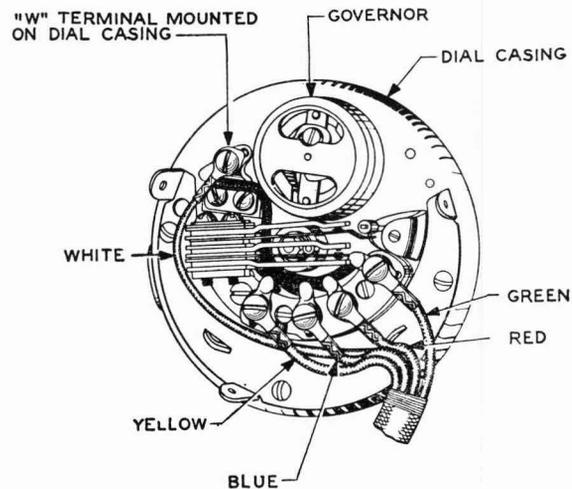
Method of Cording Dials Having a Separate W Terminal Mounted Directly on the Dial Casing, Using D5P or No. 765 Cords
